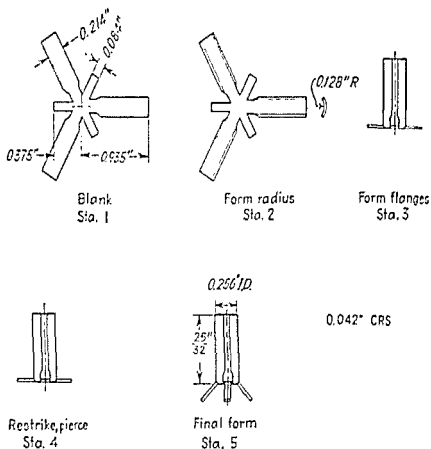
Development of a guide made from 0.042-in. cold-rolled steel on an eyelet machine. (Brighton Division, Advance Stamping Co.)
